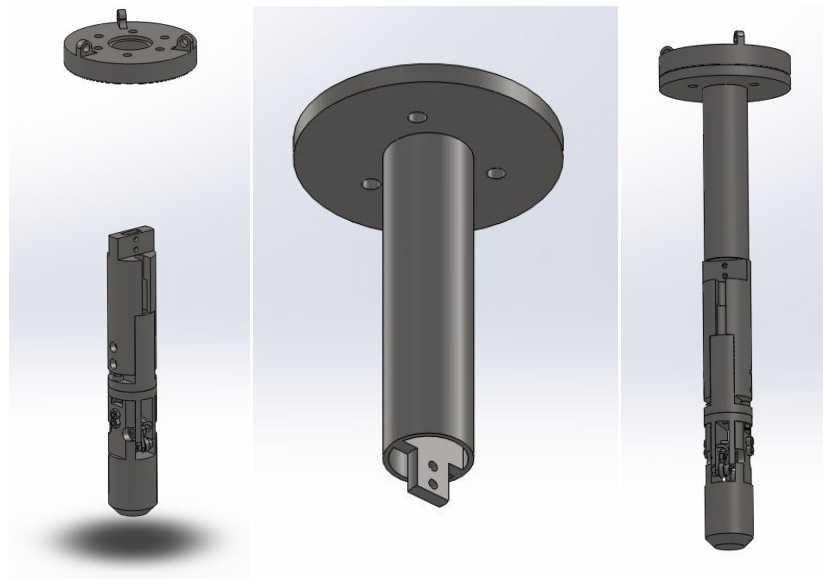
3D model of coupling concept showing from left to right: spacing arrangement; Minimole Coupling; full assembly.
